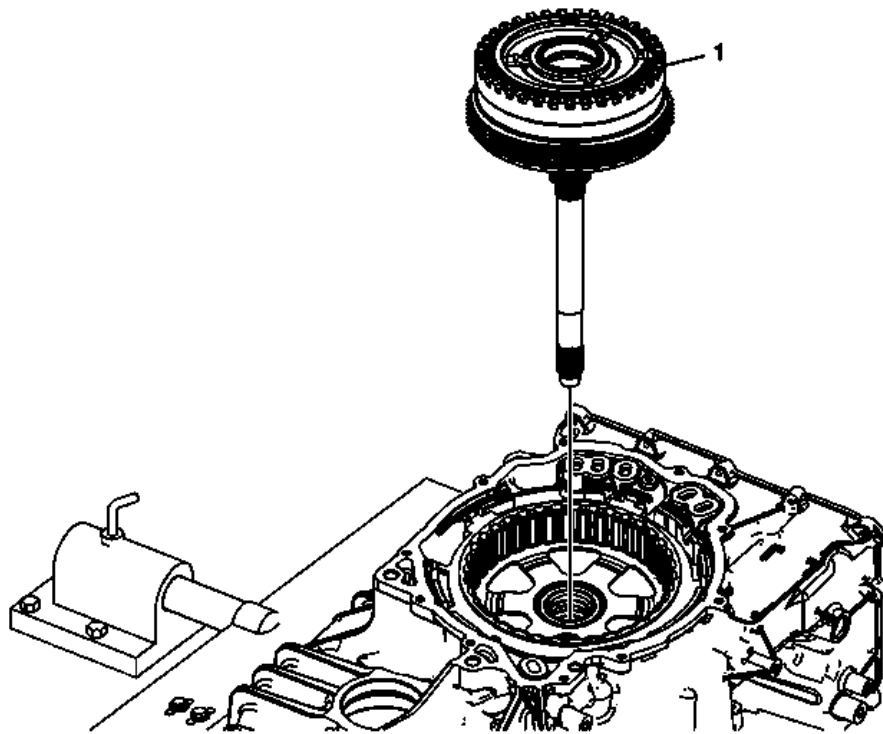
Identifying 3-5 Reverse & 4-5-6 Clutch Housing
